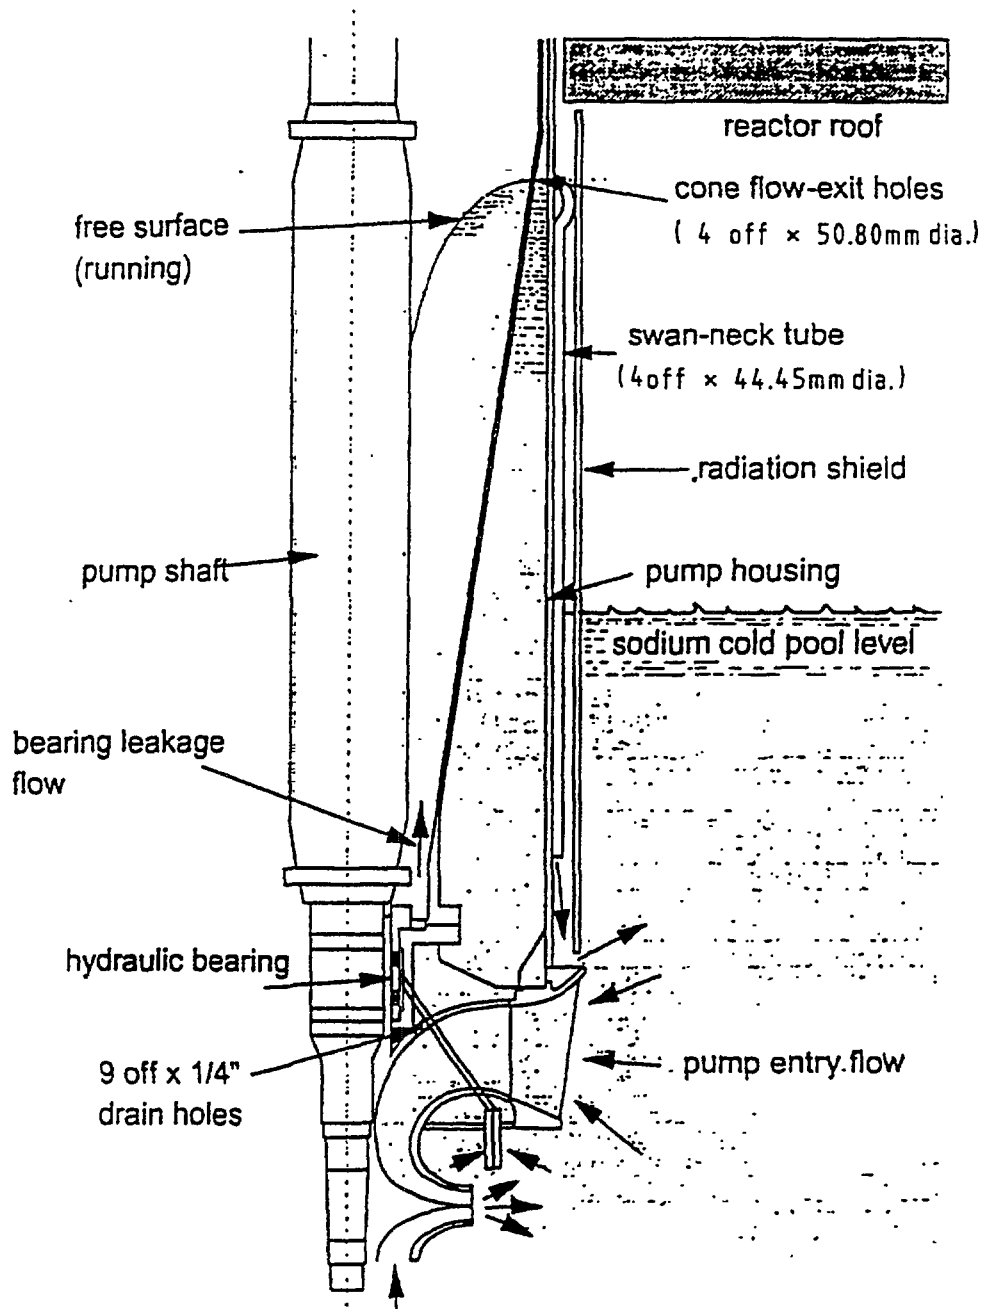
Detail of a PFR Primary Sodium Pump Housing
